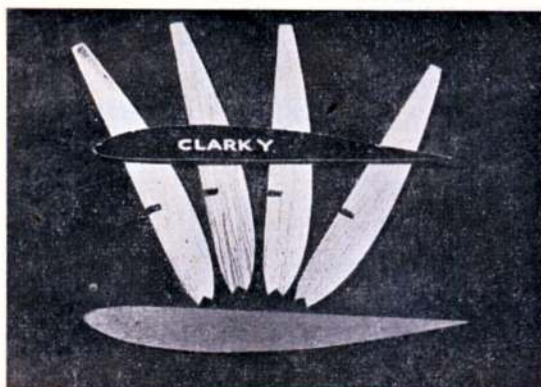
Now remove the pins, and there are your ribs, all perfectly accurate and uniform, and just shouting to be built into the wing!
